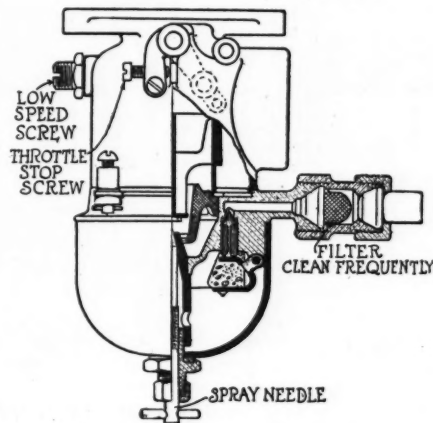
Ball & Ball carburetor used on the Oldsmobile eight, showing where adjustments are made
